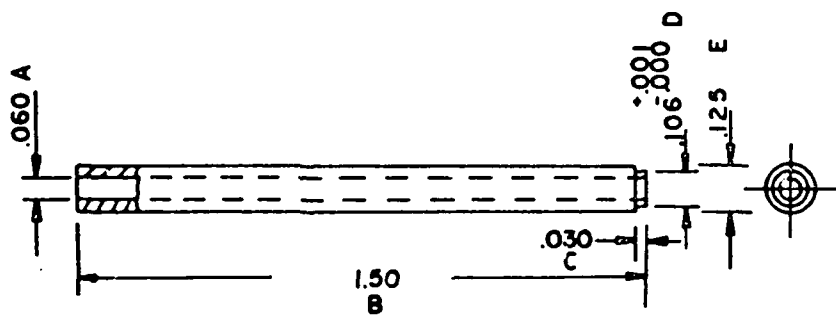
Fill tube material 304L SS, Part No. T-12016
